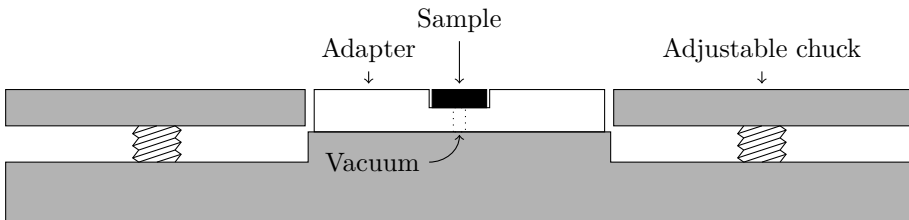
Cross-section illustration of polycarbonate adapter mounted in wafer chuck
